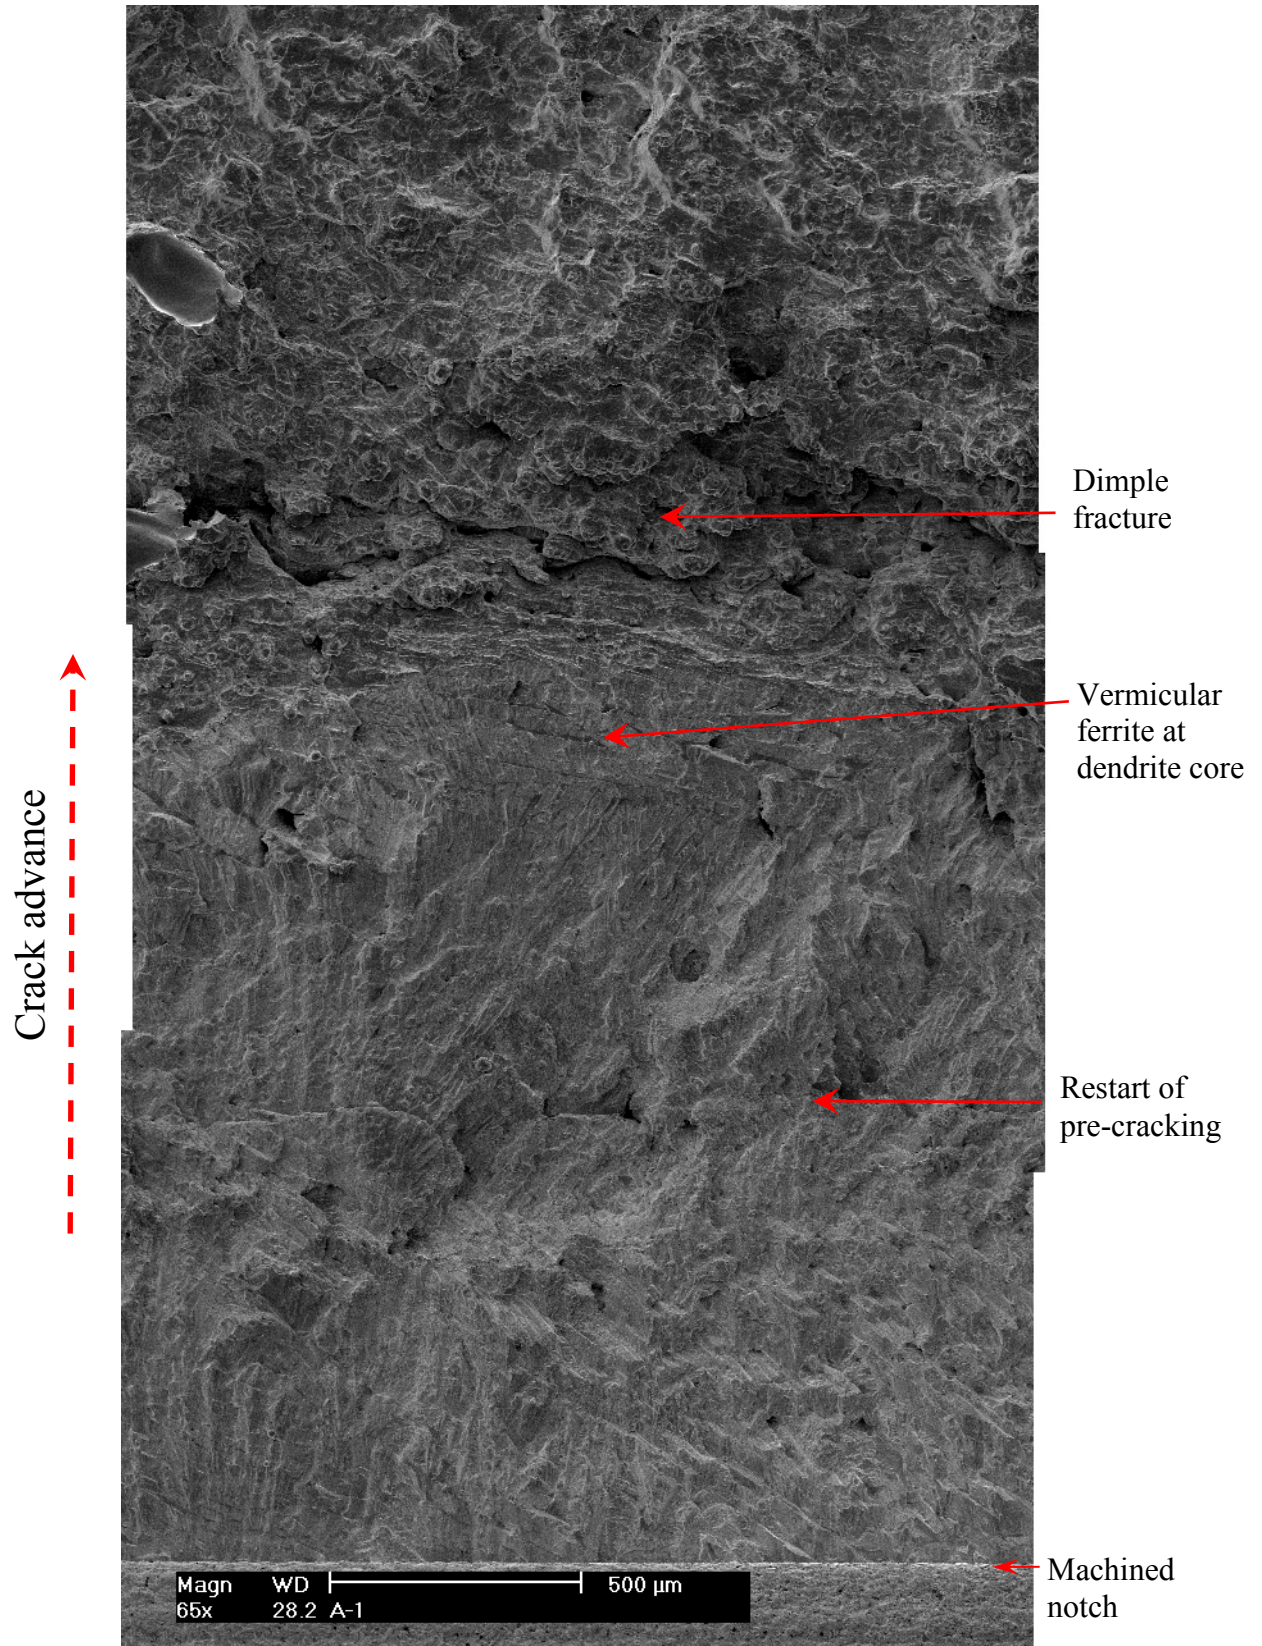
Fracture surface of specimen A-1 along the sample central line.
